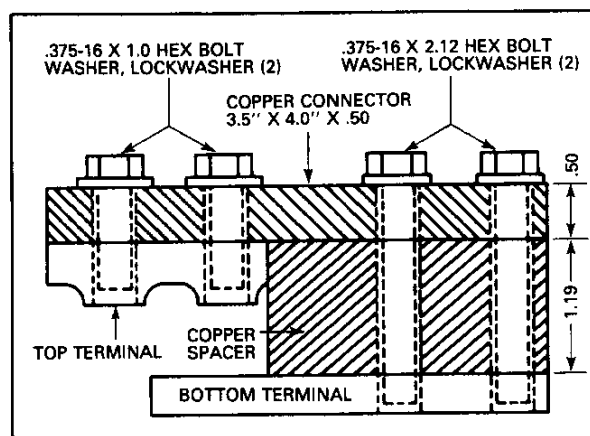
Side View of Terminals with Spacer and Connector After Removal of Electro-mechanical Trip Units
